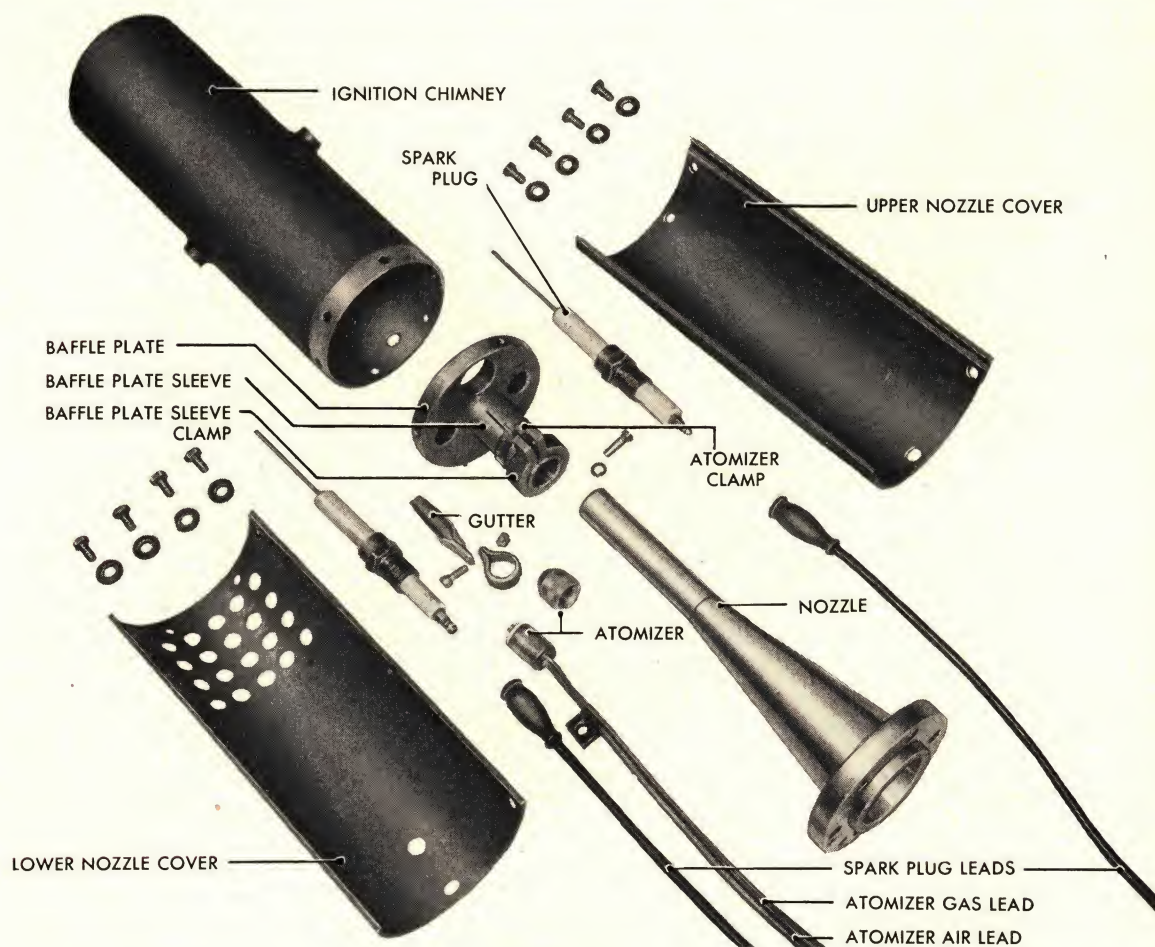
Flame Thrower Mk 1—Gun Ignition Chimney Assembly—Completely Disassembled
